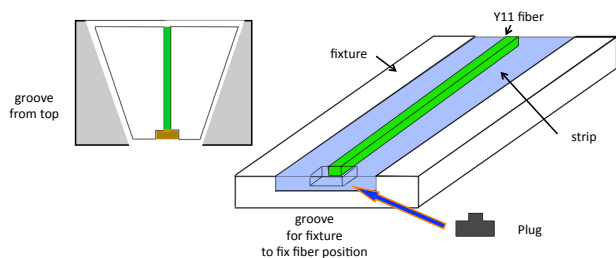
Schematic of holding the scintillator strip in a fixture for mounting the MPPC to the Y11 fiber.
